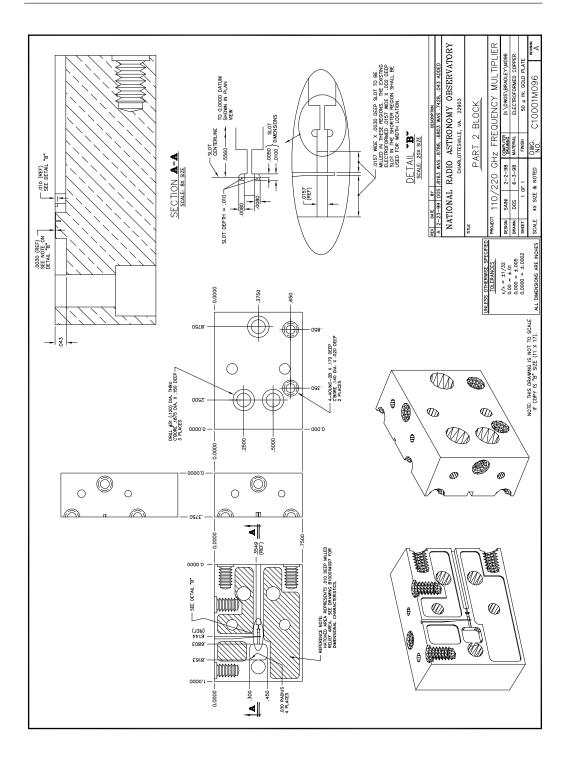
110/220 GHz frequency doubler: Mechanical details of part 2 of the two piece split block.
